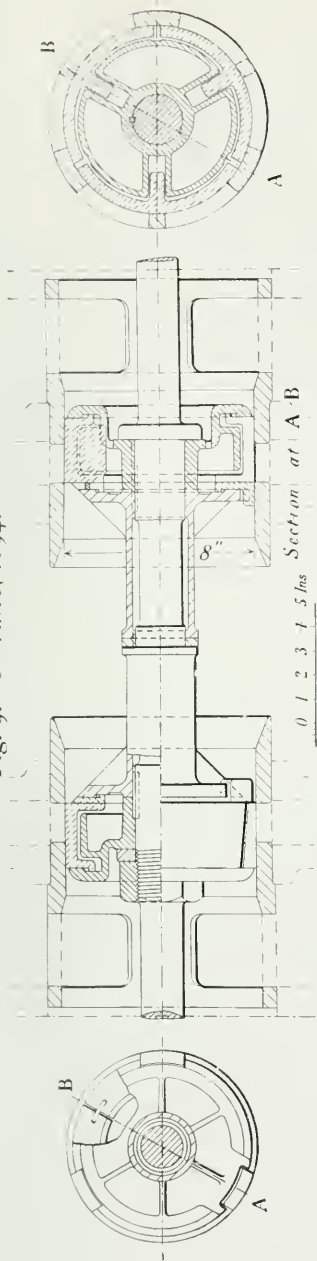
8"-Valve fitted to 7'-7" Single-Wheel Compound Express Engines, N.E. Ry, 1894.
